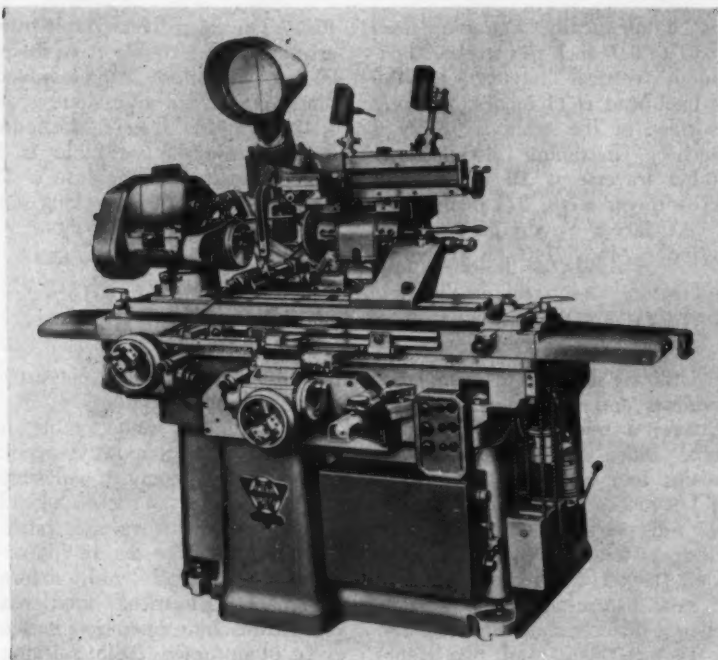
Jones & Shippman machine being sold by Micromatic for grinding circular form-tools
